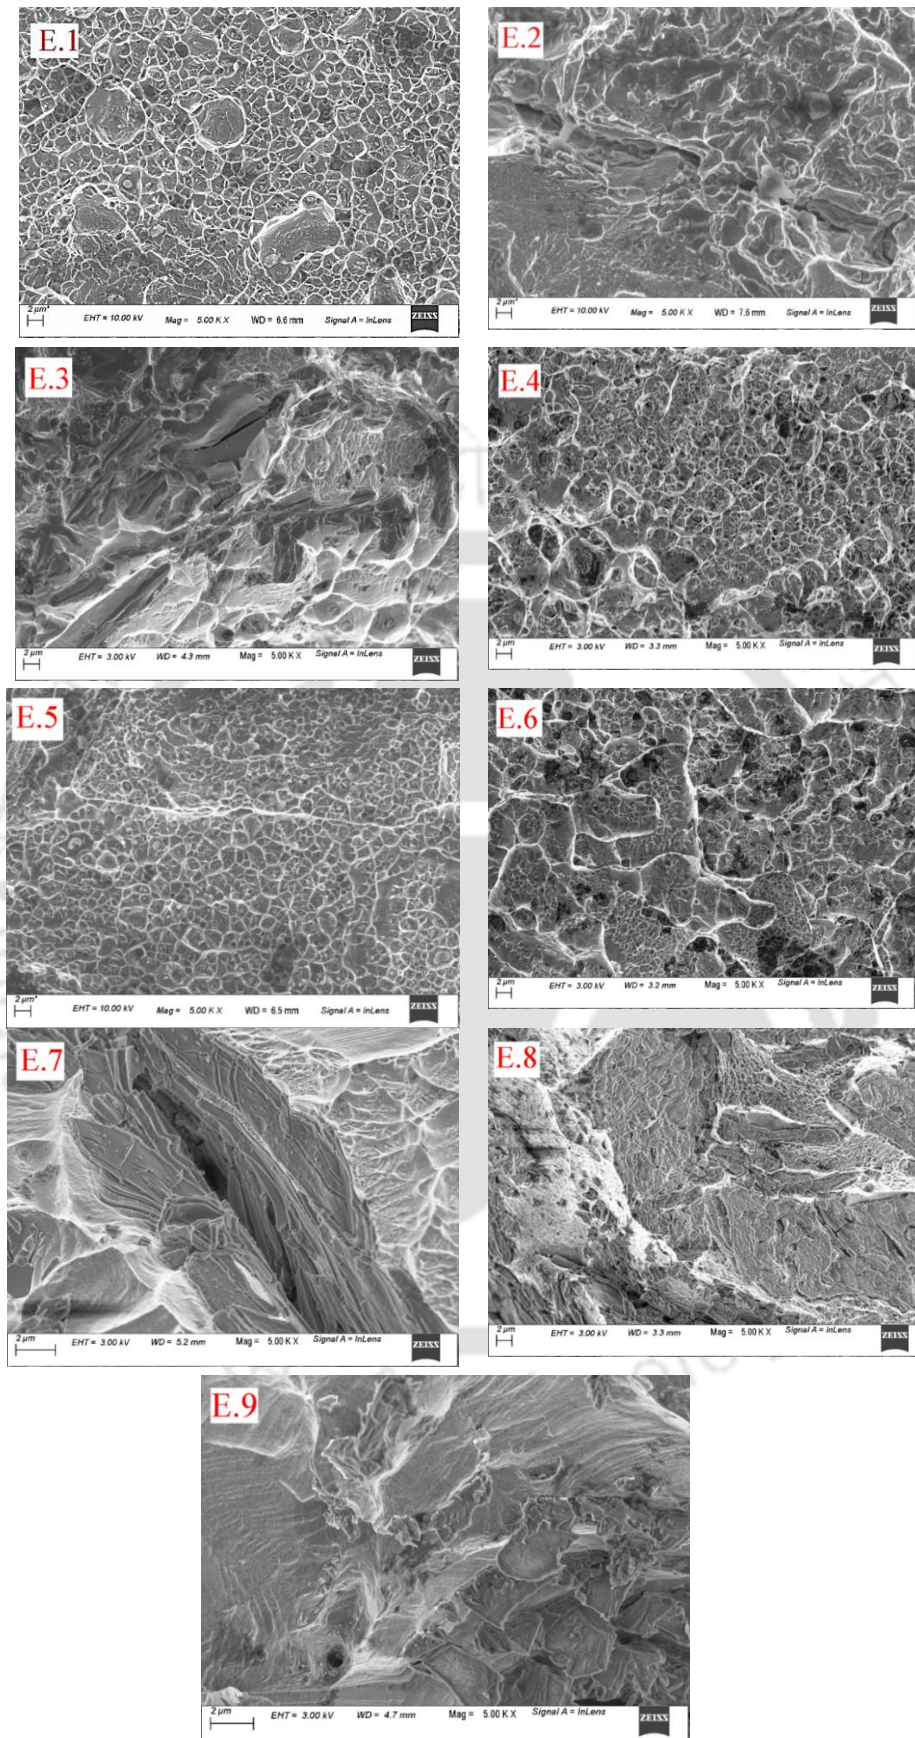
Fracture surface of HT 1050 tensile samples
